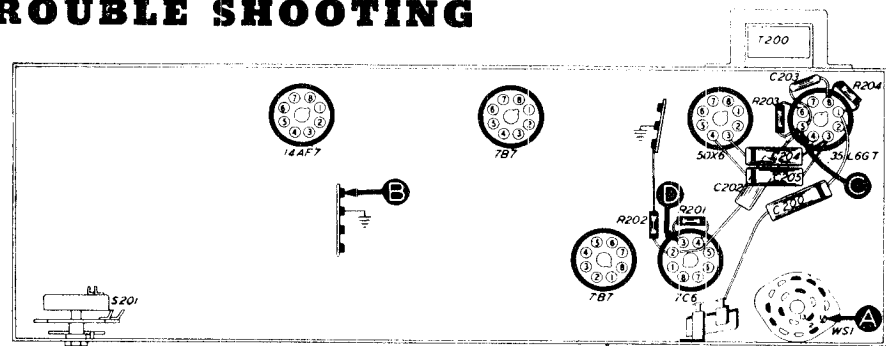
Bottom View, Showing Section 2 Test Points TP-3395B
